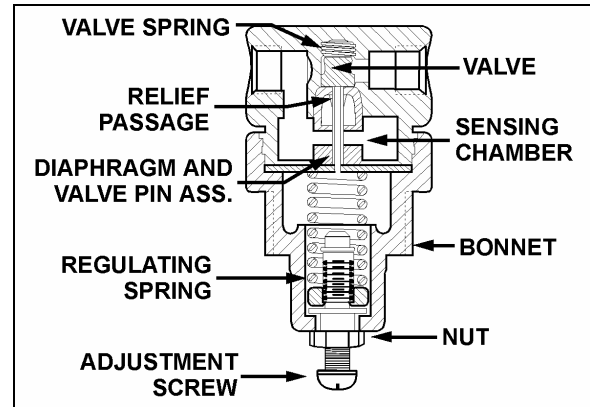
AIR PRESSURE REGULATING VALVE 12141B
